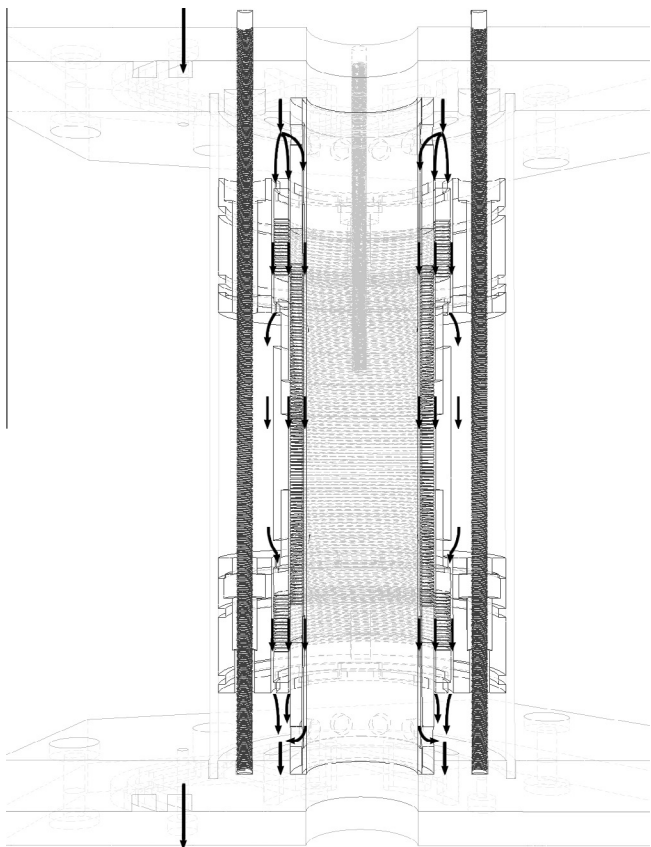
Half section of the magnet assembly. The arrows indicate the flow of the coolant in axial direction.
